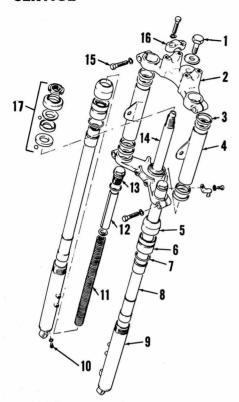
Exploded view of front suspension system used on 90cc Suzuki.
